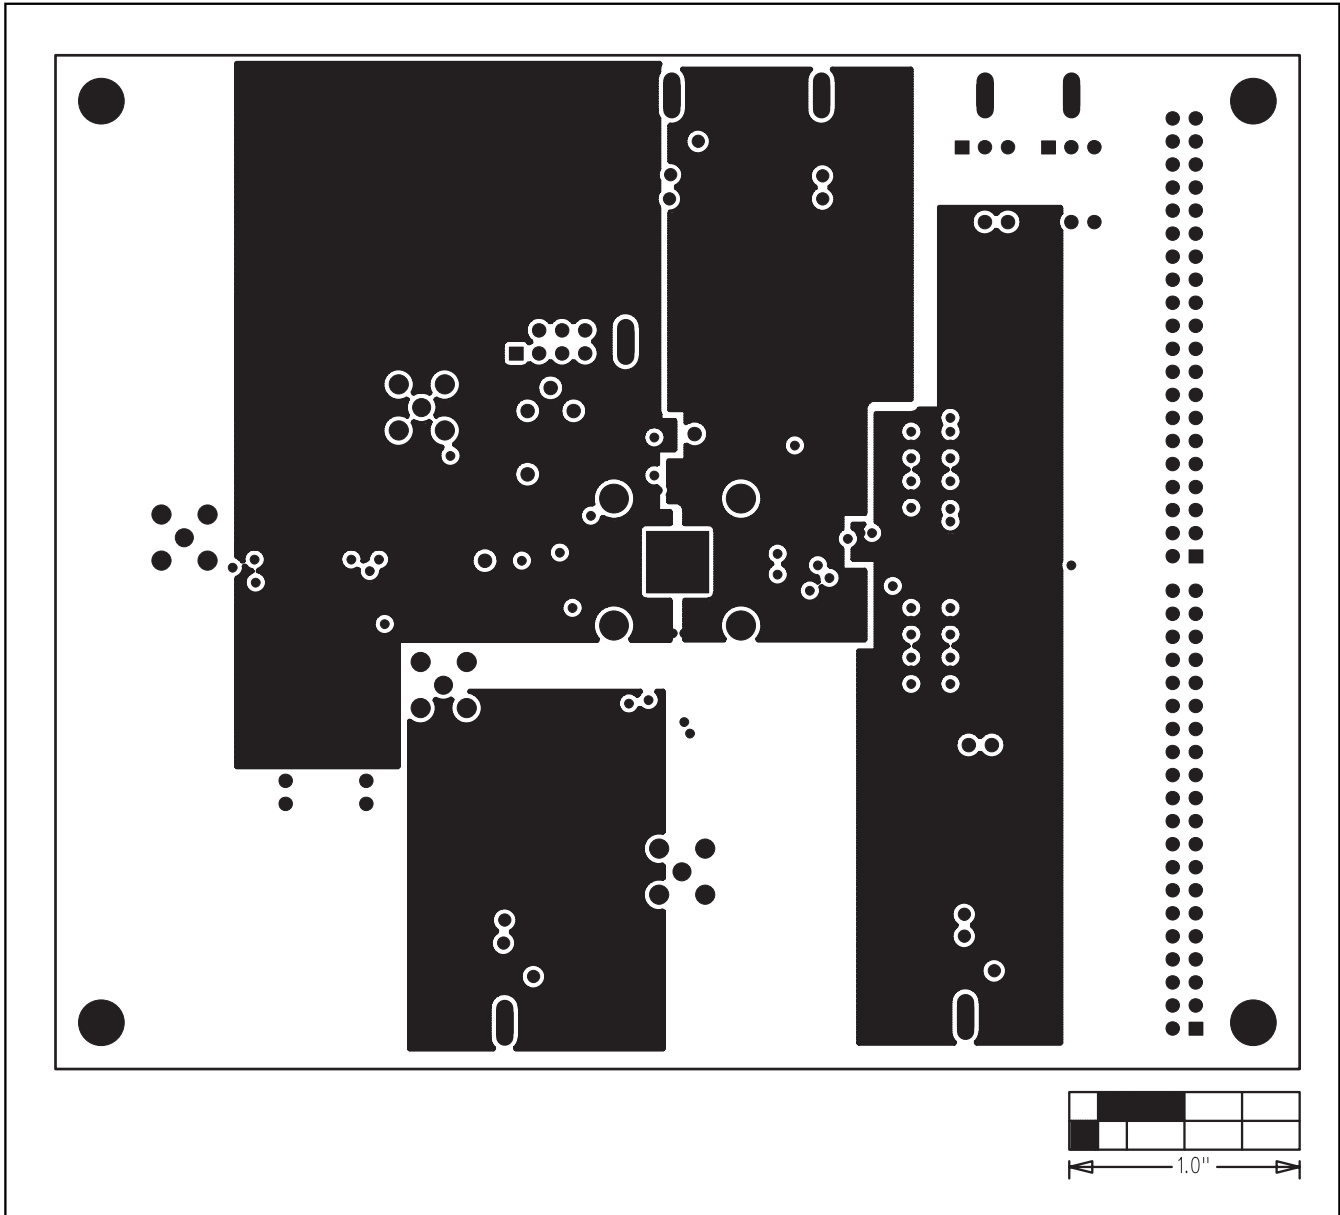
MAX19542 EV Kit PC Board Layout—Power Planes (Inner Layer 3)
